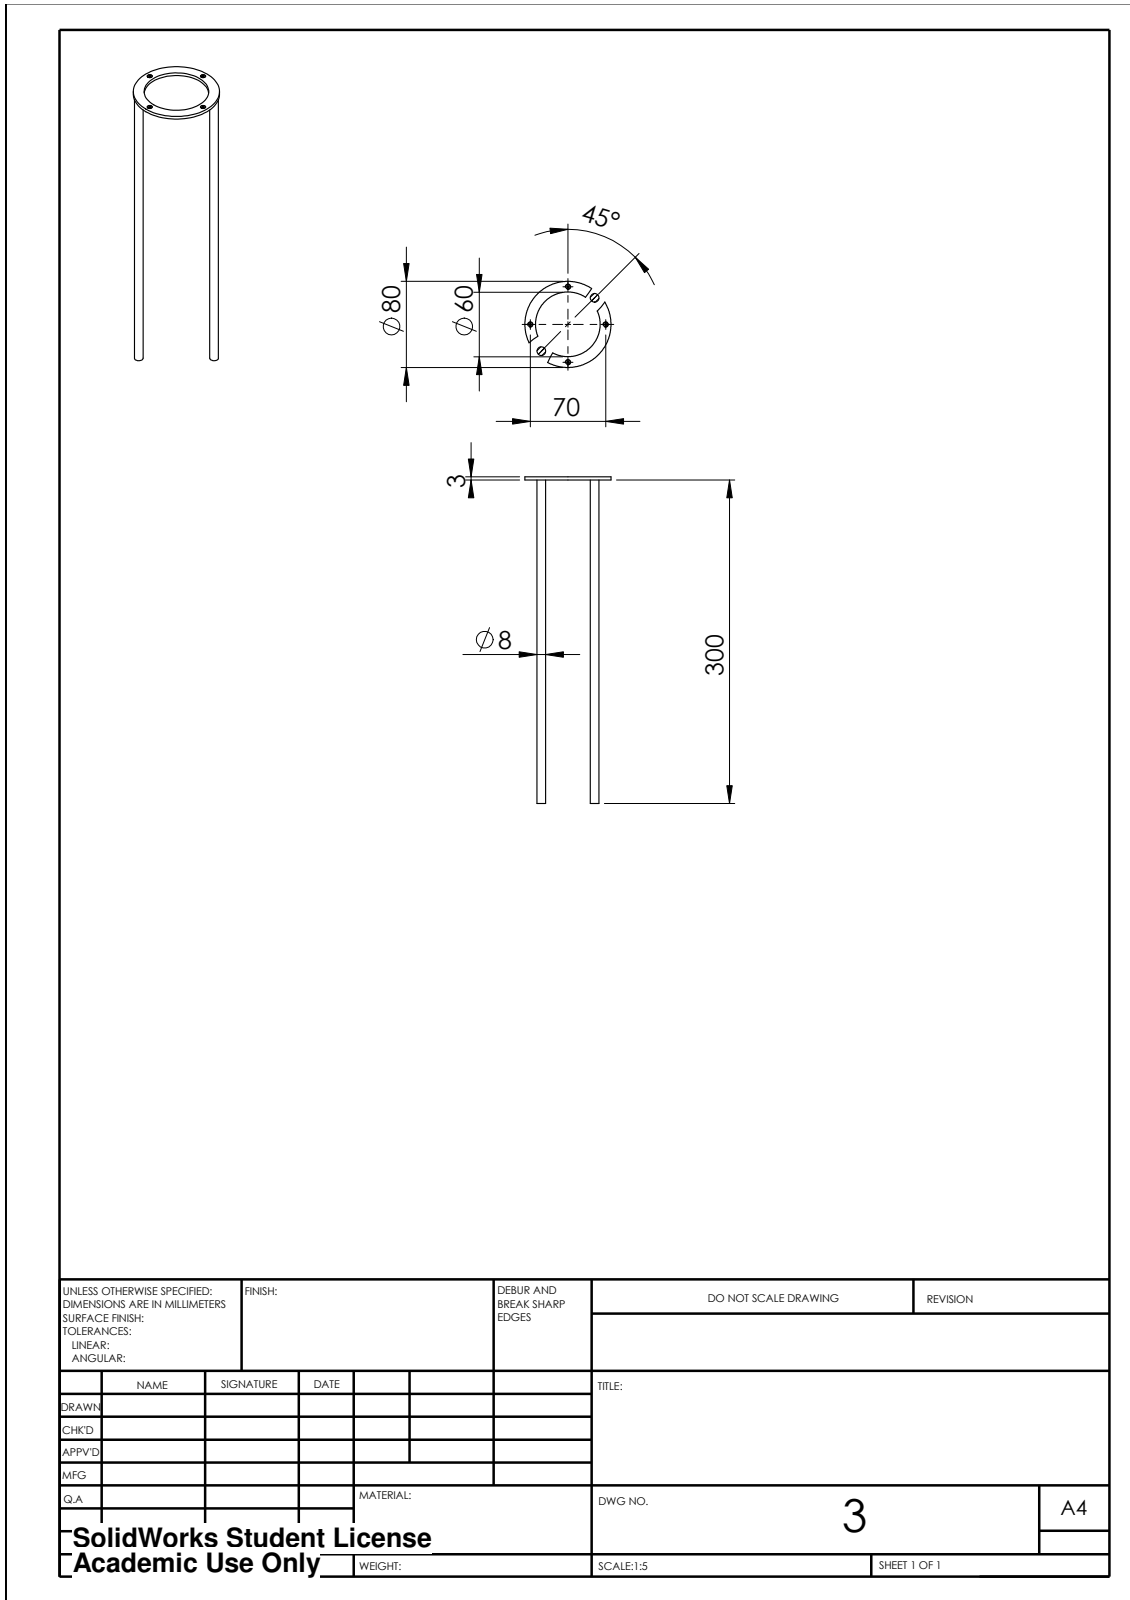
Technical drawing of the guiding bars for the movement along z axis.
